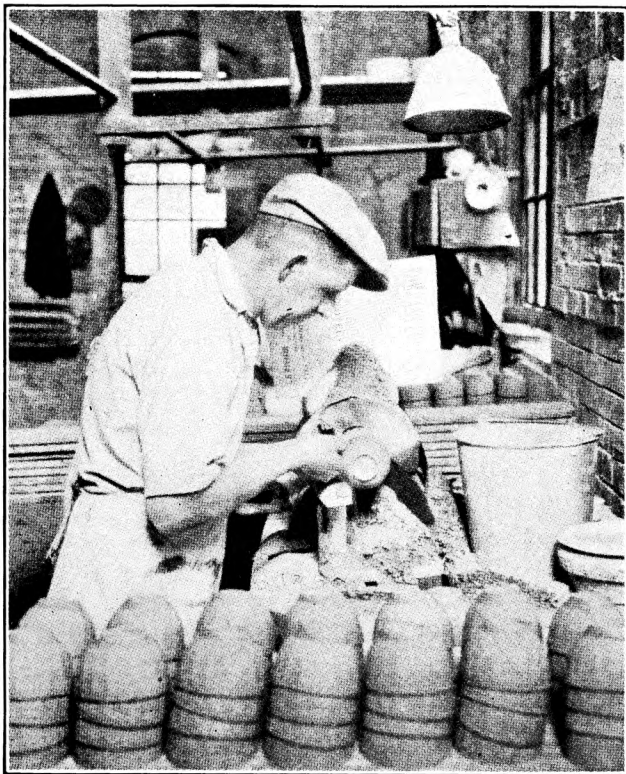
TURNER AT LATHE FINISHING OUTSIDE OF CUP WHICH WAS SHAPED BY JIGGERMAN
